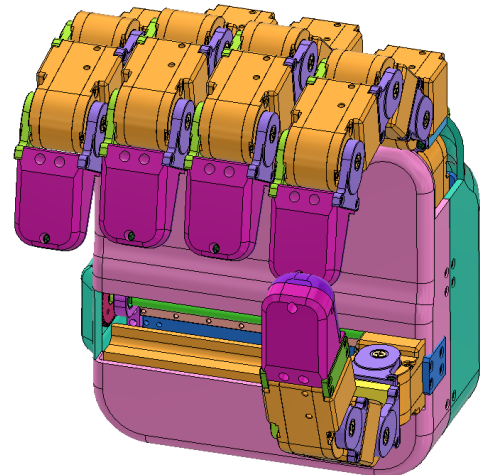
Modified HX5-D20 robotic hand incorporating a prismatic thumb mechanism
